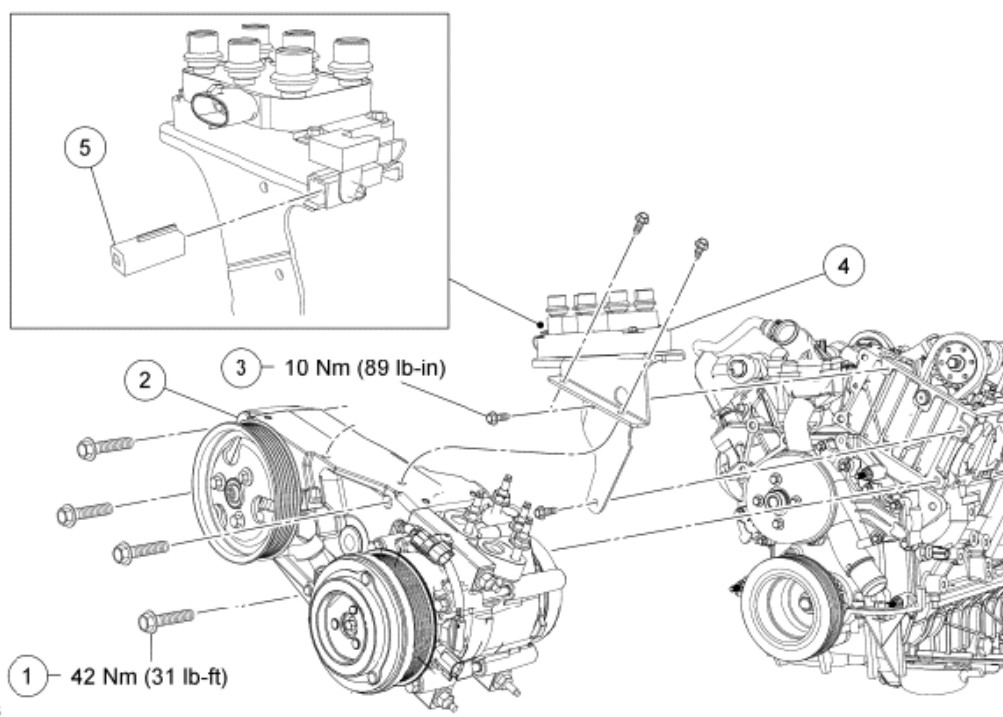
Identifying Power Steering Pump And A/C Compressor Bracket And Ignition Coil Components With Torque Specifications
